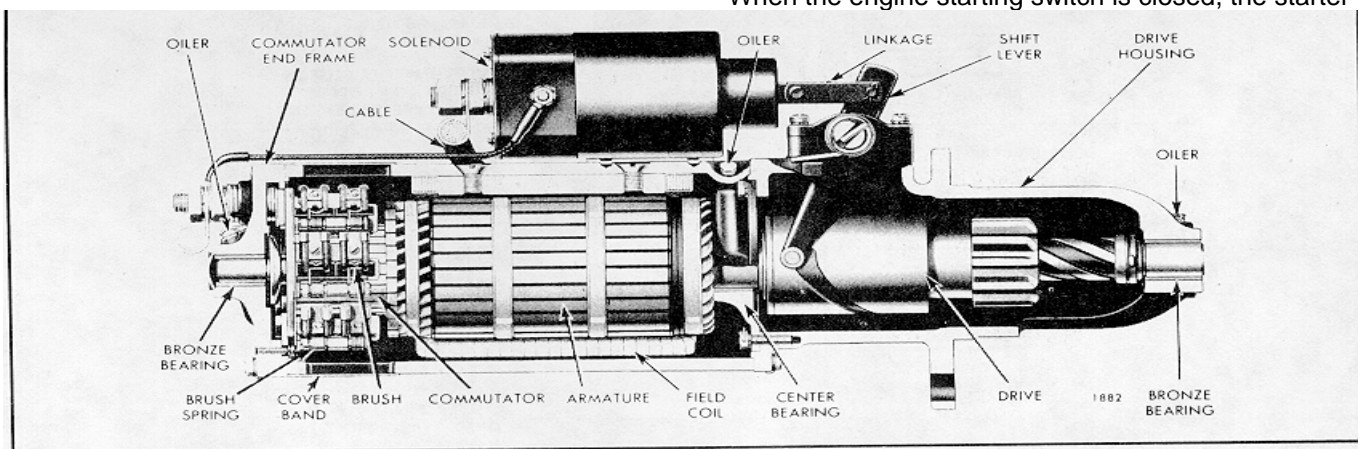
Cross-section of Starting Motor with Dyer Drive
